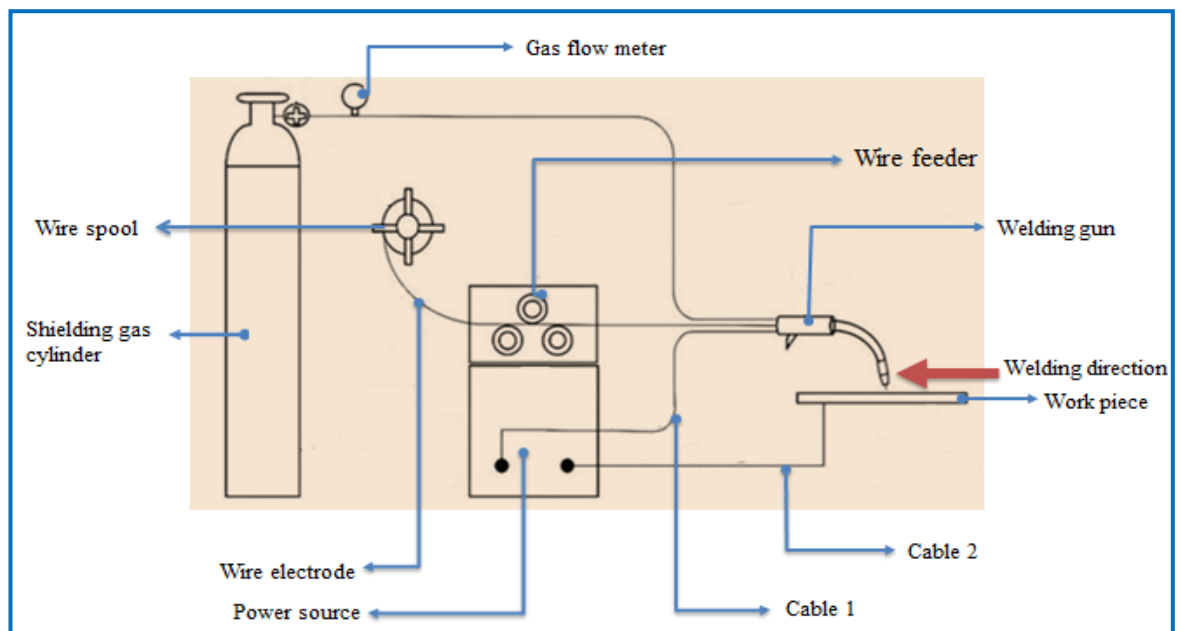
Arrangement of components in a Gas Metal Arc Welding (GMAW) system
